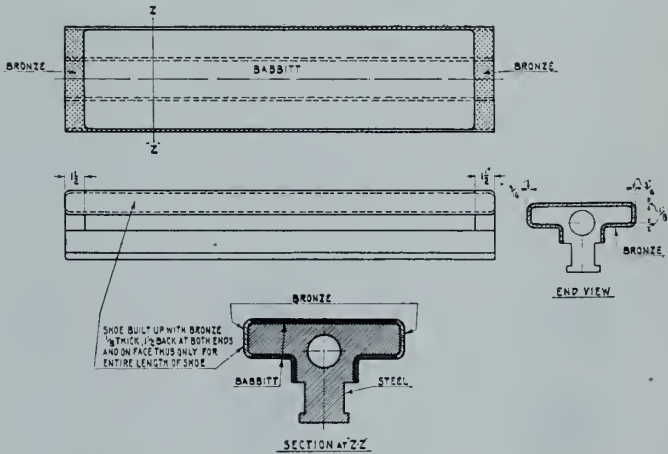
Method of applying bronze in crosshead wearing face to prevent breakage at edges of arsenical-lead babbitt.
